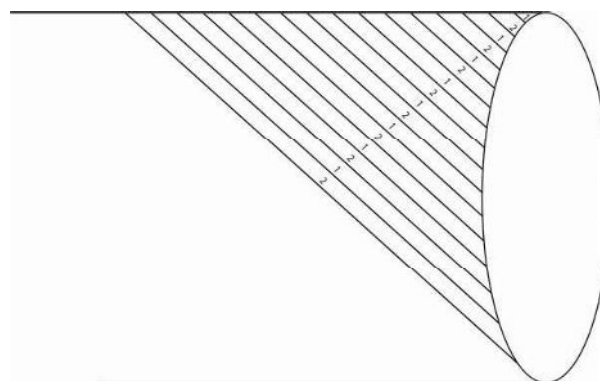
b Disposition of toothed strips 1 and bare strips 2 on the surface of taker-in roller in mounting of the wire for reuse.
